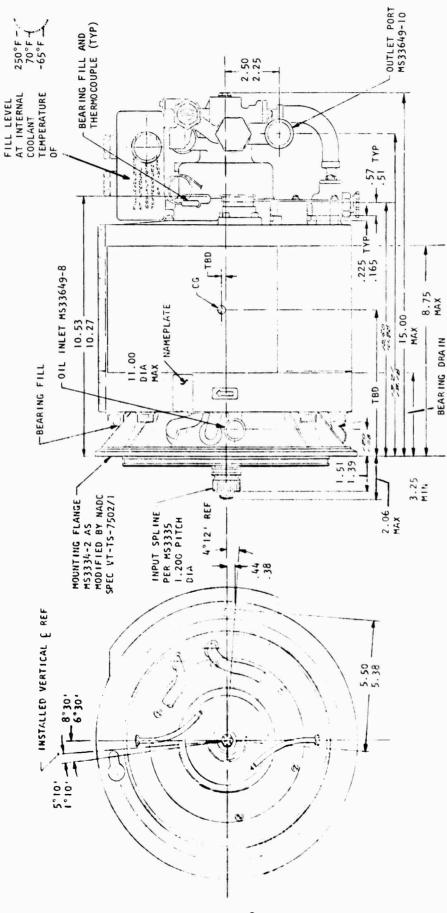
270 VDC Generator Outline, PN 518988 (Sheet 1)
